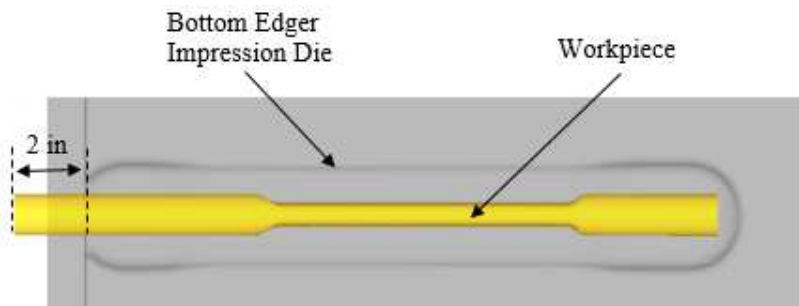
Workpiece positioning for the edger impression operation of the existing wrench forging process
